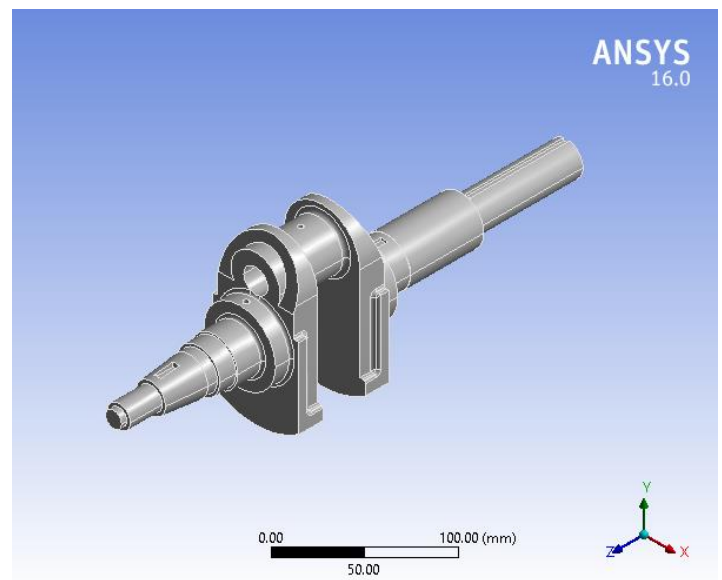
Single cylinder engine crankshaft model with SOLIDWORK
